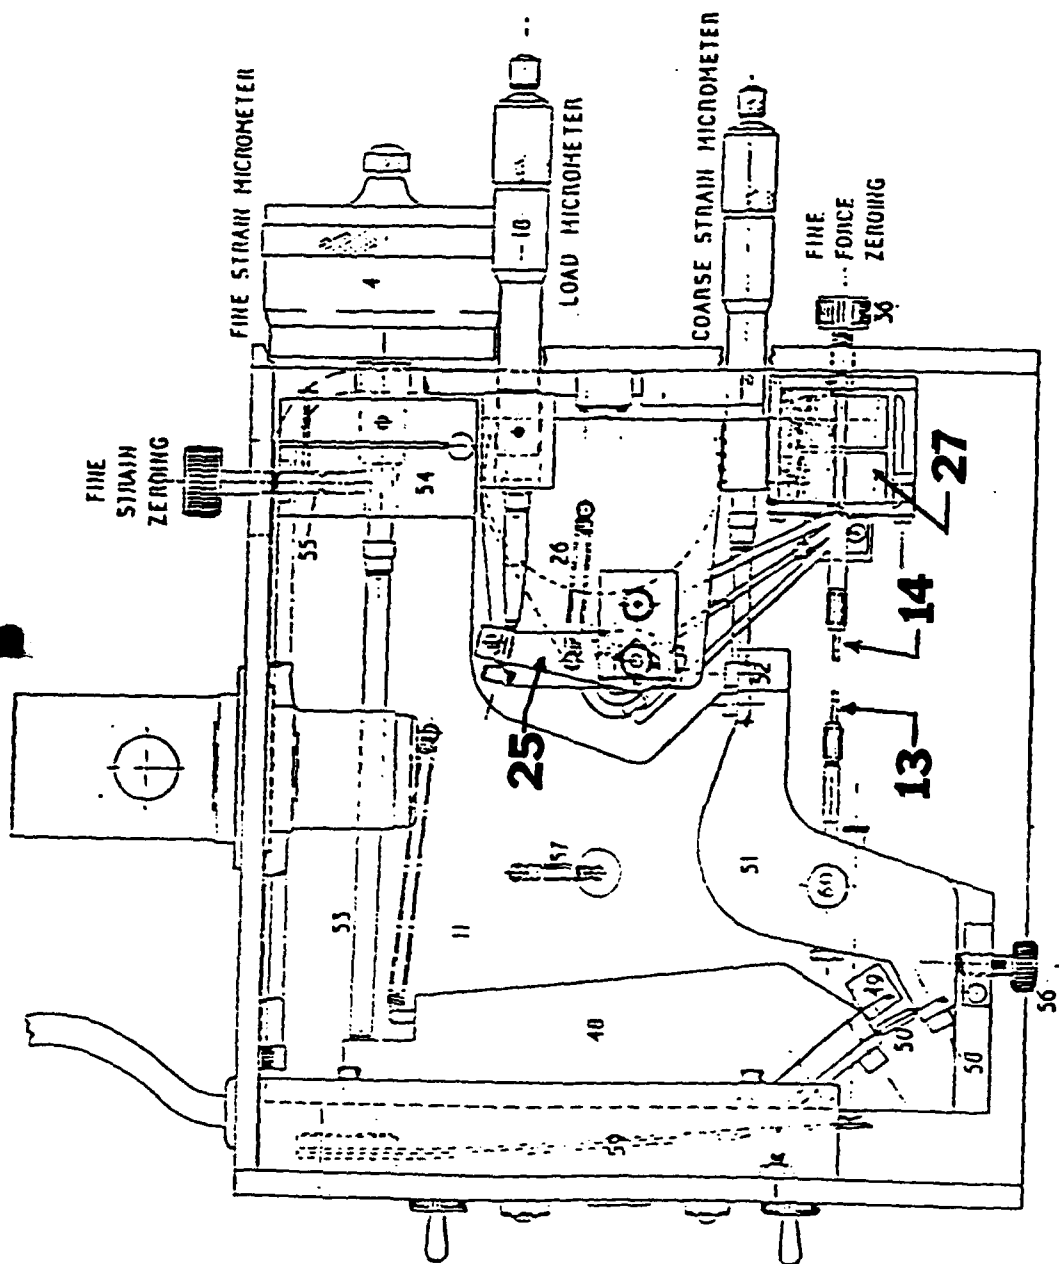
Top View of Tecam Micro-Tensile Testing Machine with Top Face Plate and Travelling Microscope Removed
